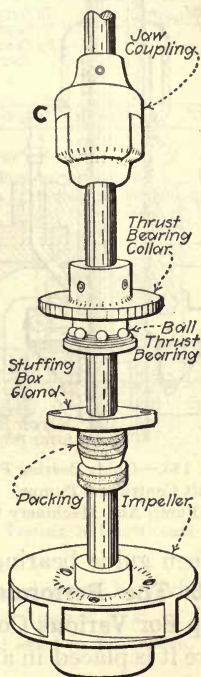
Showing Rotating Parts And Thrust Bearing Of A Vertical Centrifugal Pump. (The Goulds Mfg. Co.)
